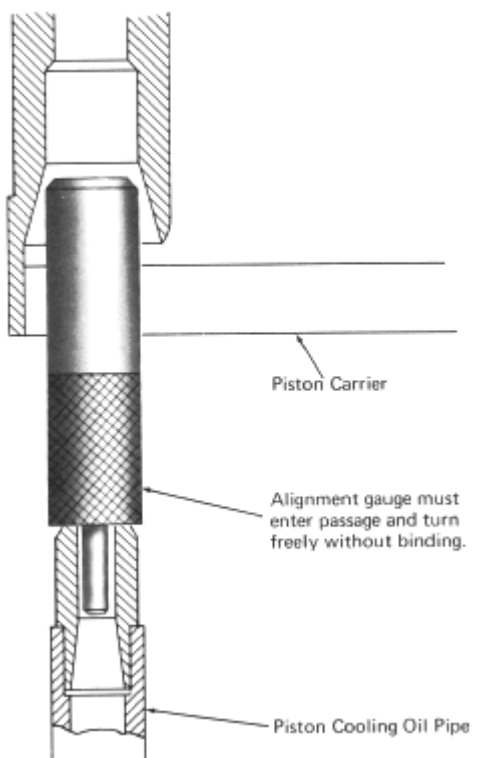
Piston Cooling Oil Pipe Alignment
